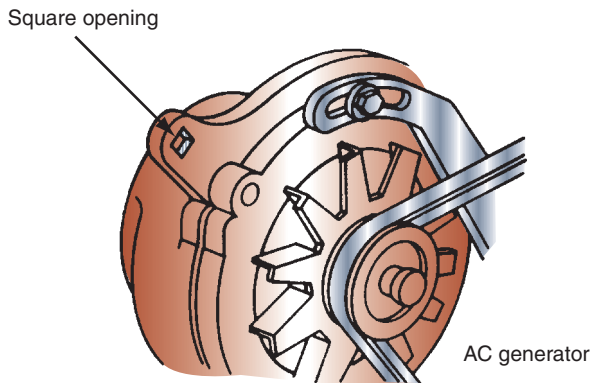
A typical method of adjusting belt tension at the brackets of the generator.
